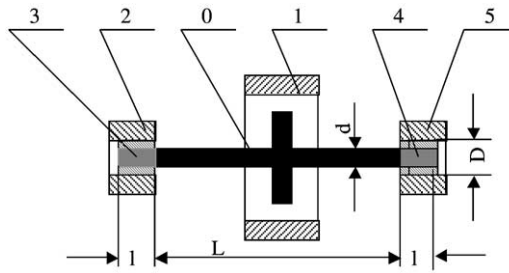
Rotor system: 0, rotor; 1, case; 2, left bearing; 3, left shaft neck; 4, right shaft neck; 5, right bearing.
